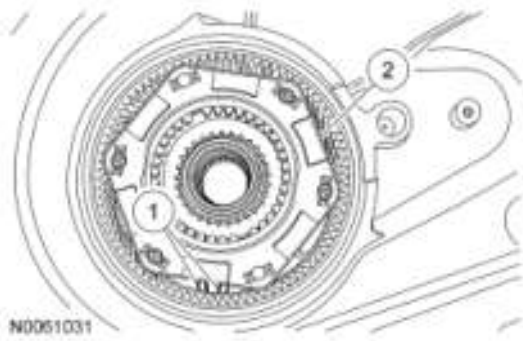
Identifying Snap Ring And Front Planetary Gear Set Assembly
